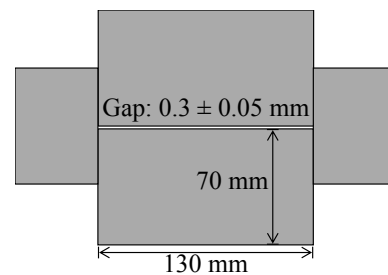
Weld sample geometry. Waterjet cut from 25 mm plate and milled on the internal weld face. The samples are symmetric w.r.t. the root gap. Run-in and run-out plates are shown on the sides.
